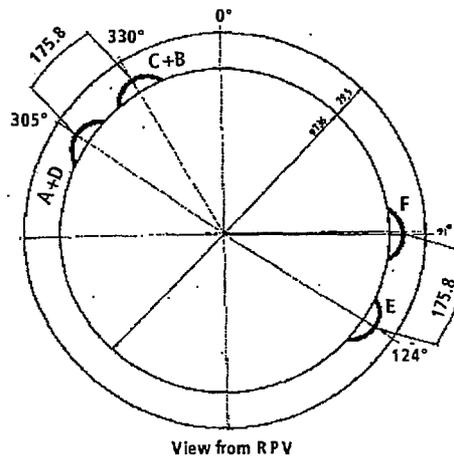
Cross section of nozzle to safe end weld. 0° is in the direction of the RPV head. Letters denote location of boat samples.
